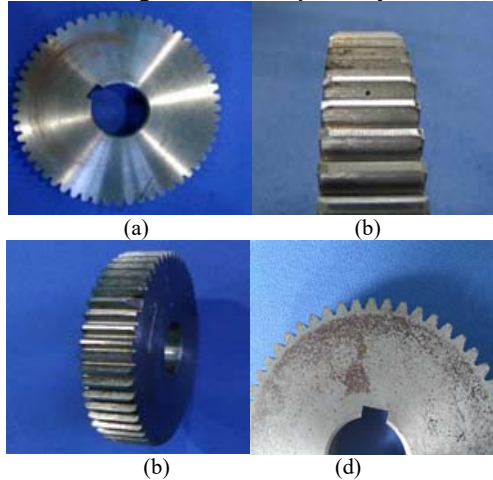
Experimental test gears: (a) healthy gear, (b) spalling tooth, (c) chipped tooth, and (d) faulty gear cracks
